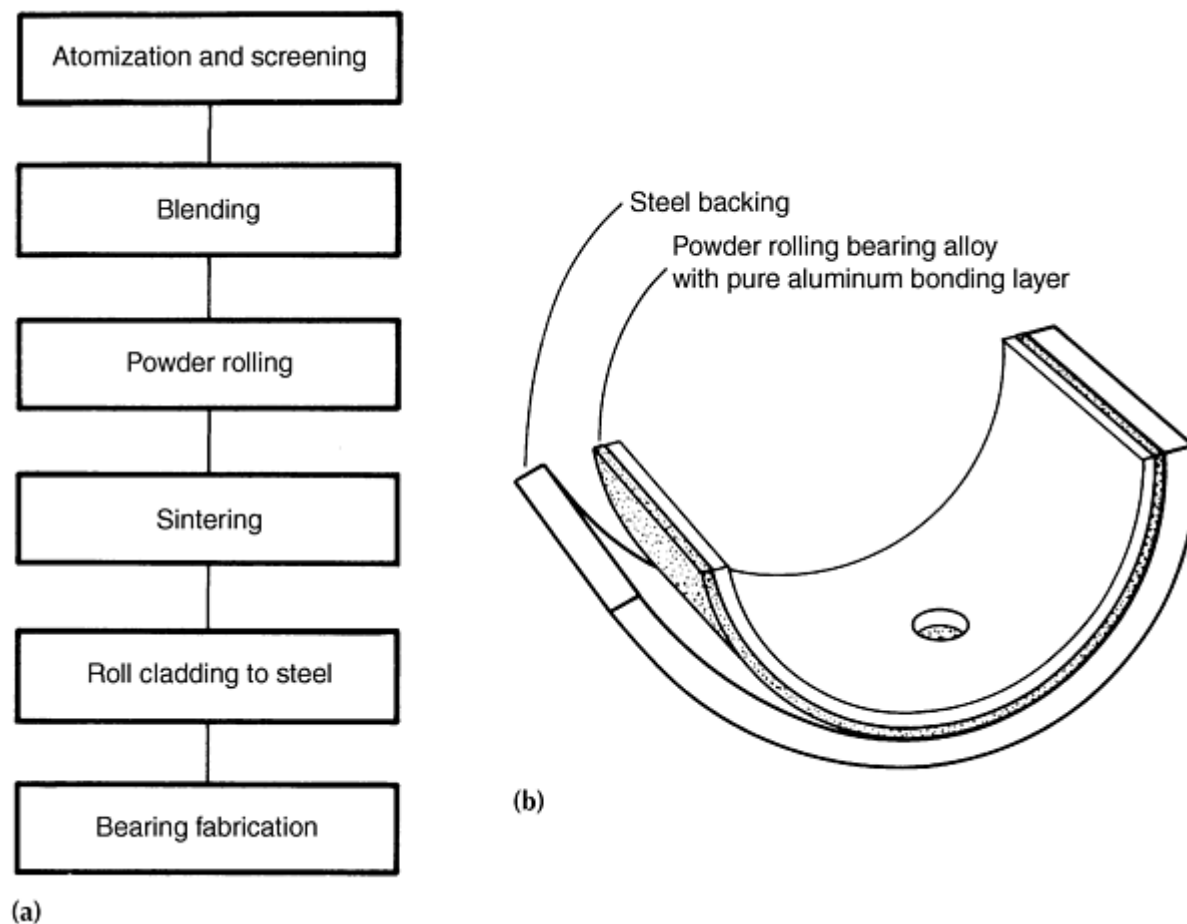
Fabrication of powder-rolled sleeve bearing. (a) Flowchart. (b) Sleeve-bearing component
